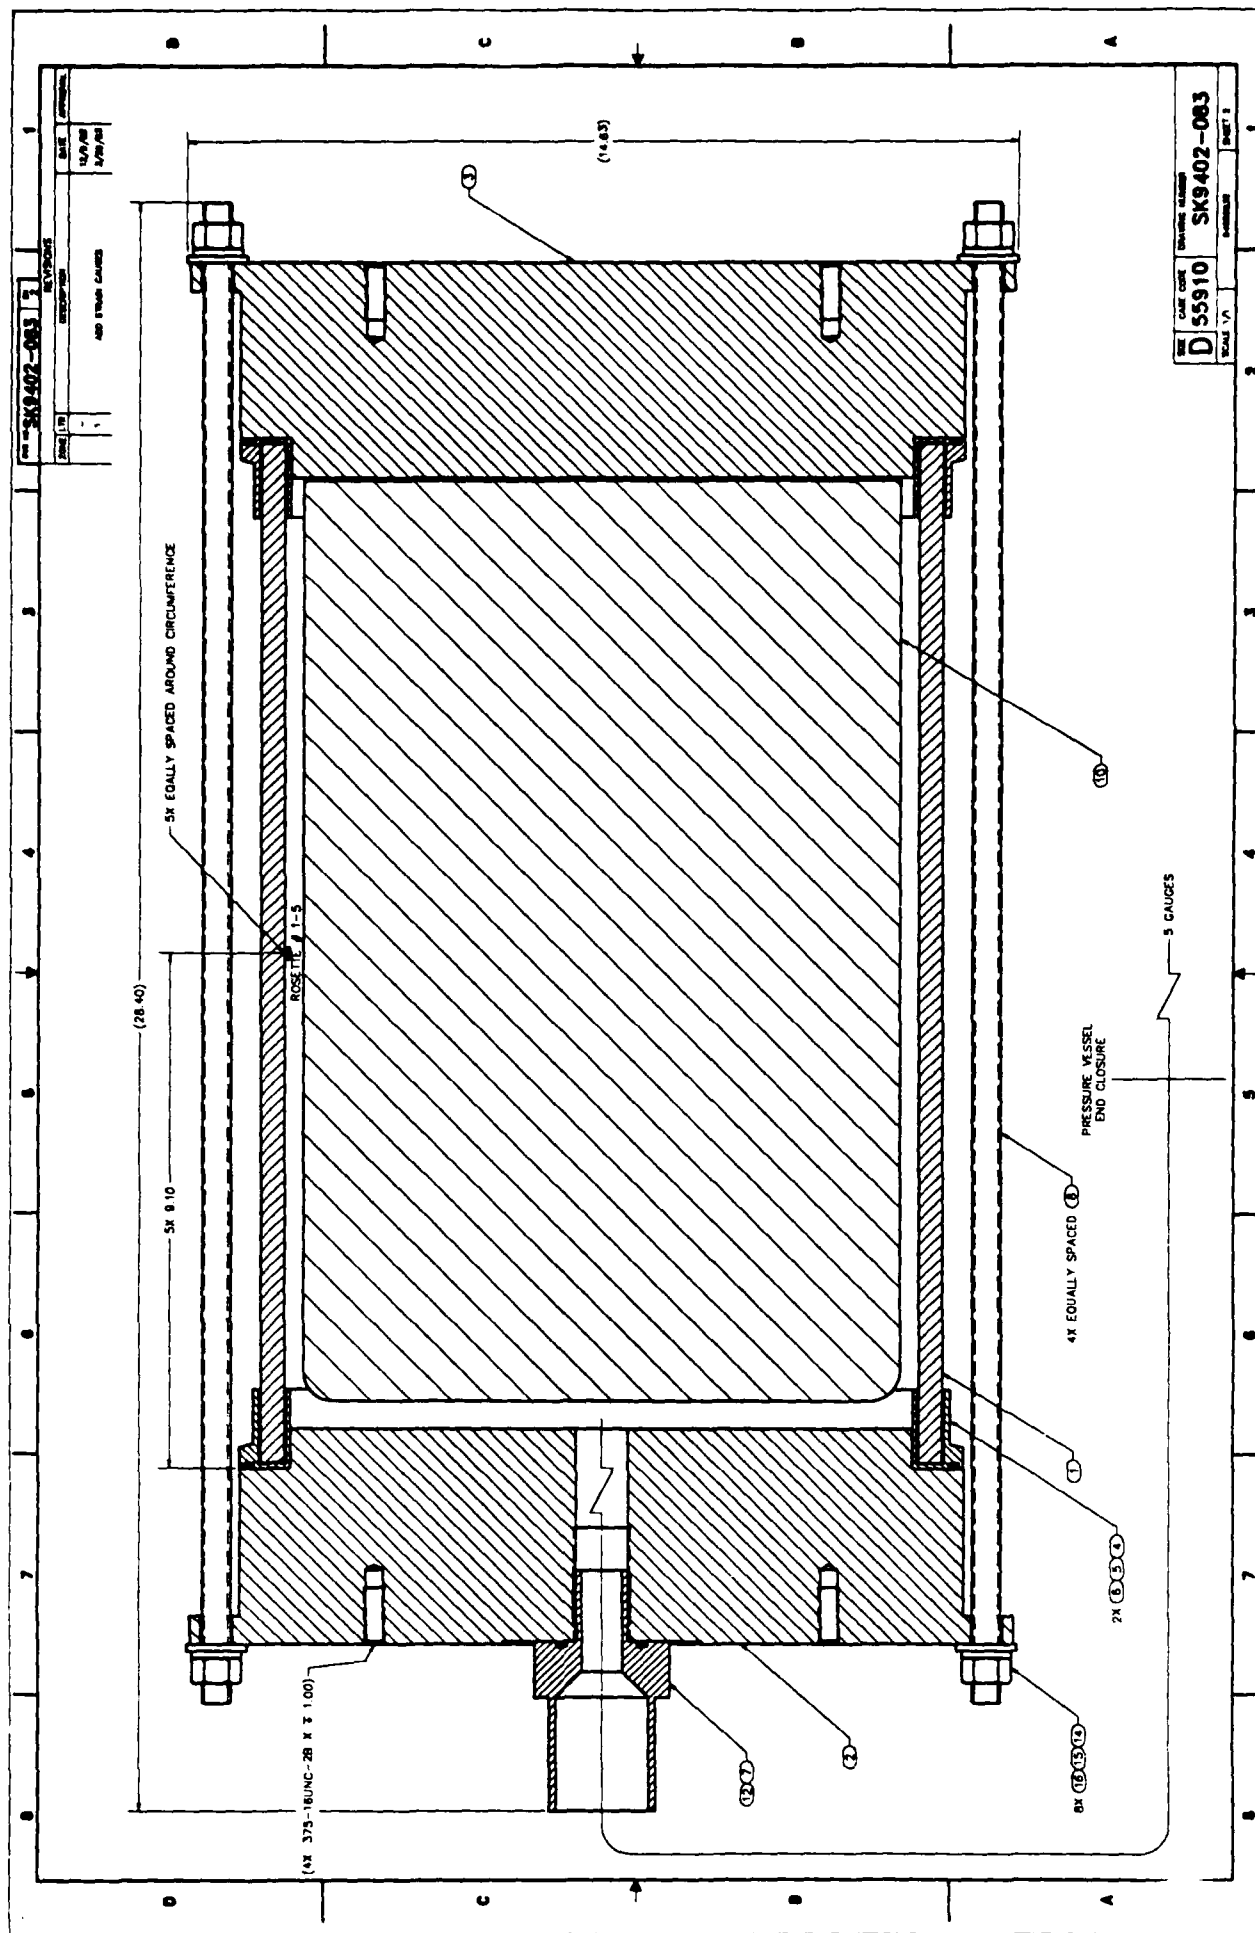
12-inch cylinder test assembly, Type III configuration, Sheet 2.
